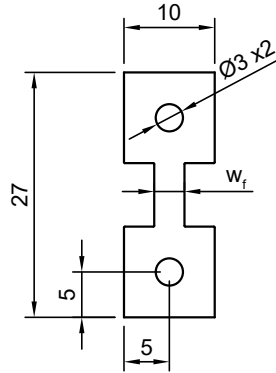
Technical drawing and dimensions of flexure with variable width w_f to change the flexural rigidity
